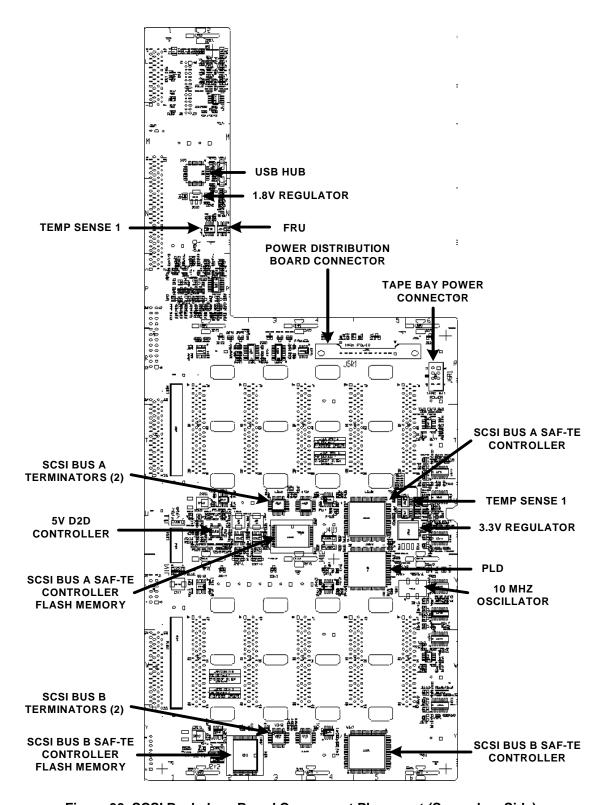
SCSI Backplane Board Component Placement (Secondary Side)
